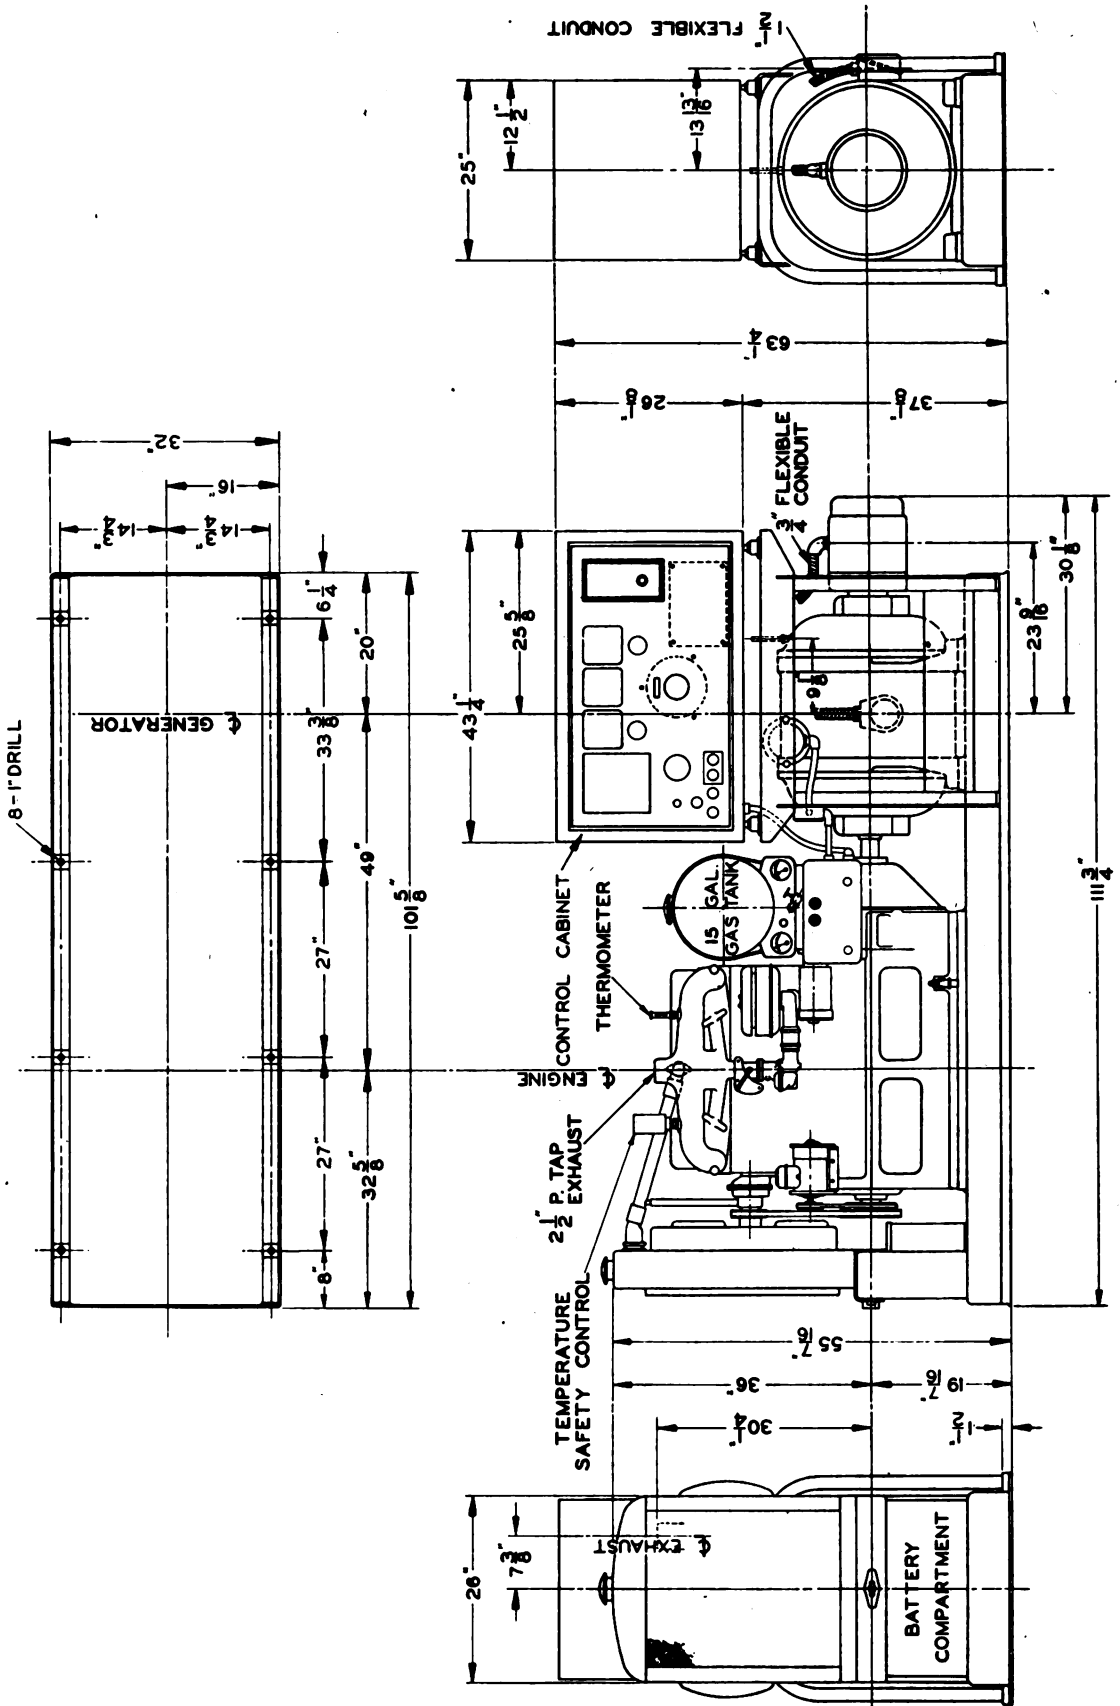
Installation and Dimensional Drawing of Power Unit (Serial Nos. 181832 to 181955)
